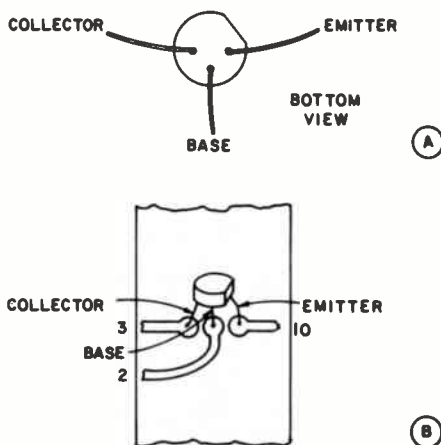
Mounting the second NPN transistor on the circuit board.
